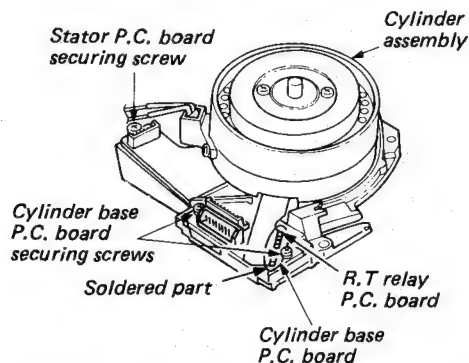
Relay P.C. board and cylinder base P.C. board
